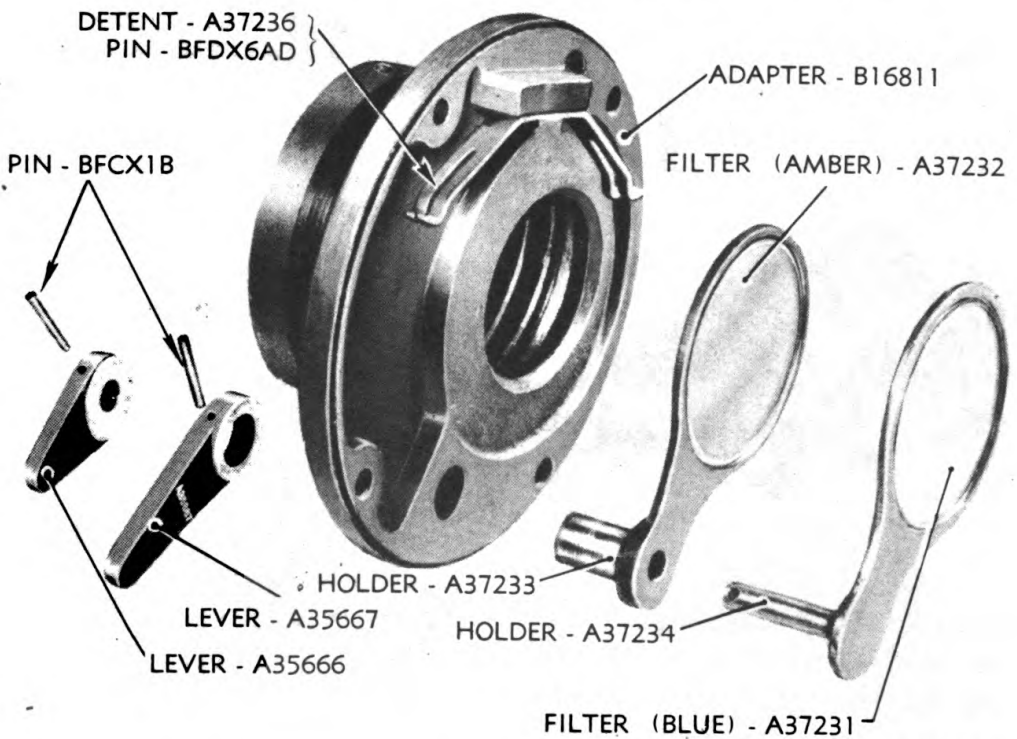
Telescope M3—Eyepiece Assembly Disassembled
